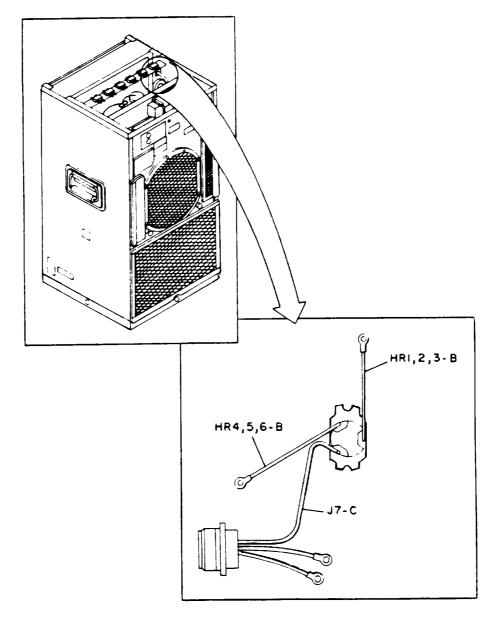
Terminal Location, Heater Thermostat (S3) (Overheat Safety).
